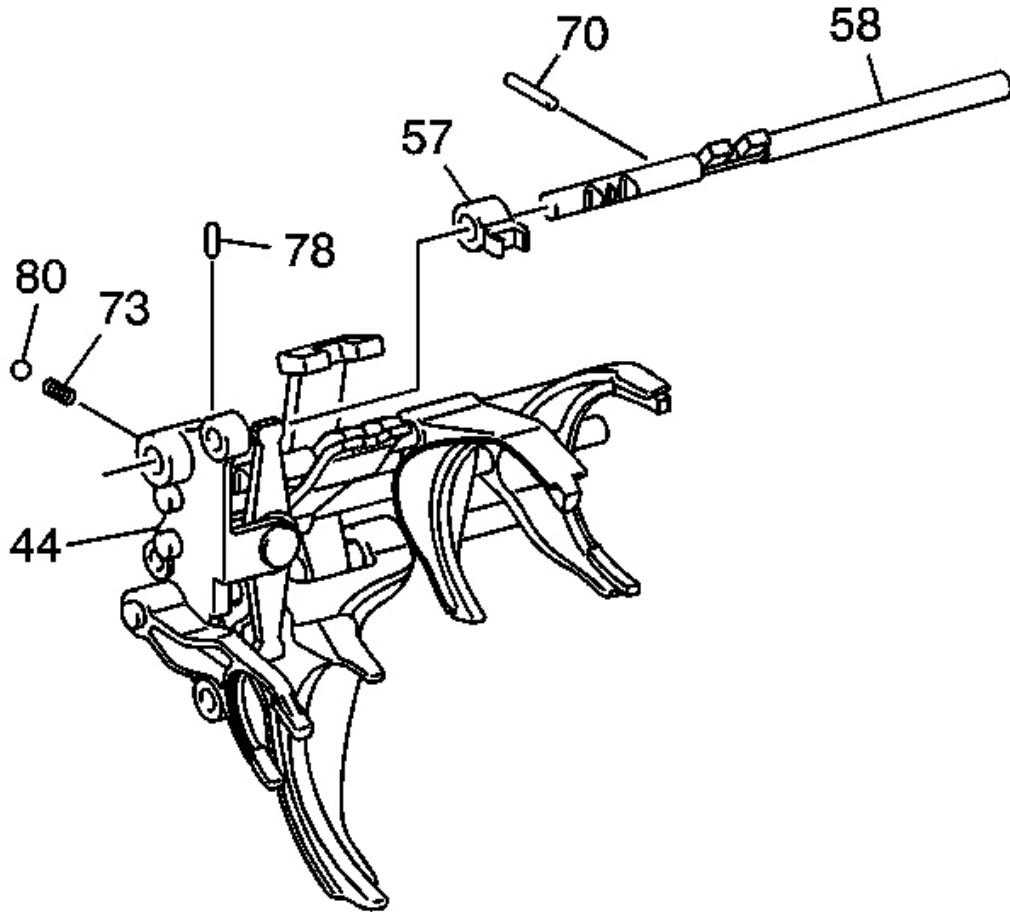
View Of 1st/2nd Shift Shaft & Components
